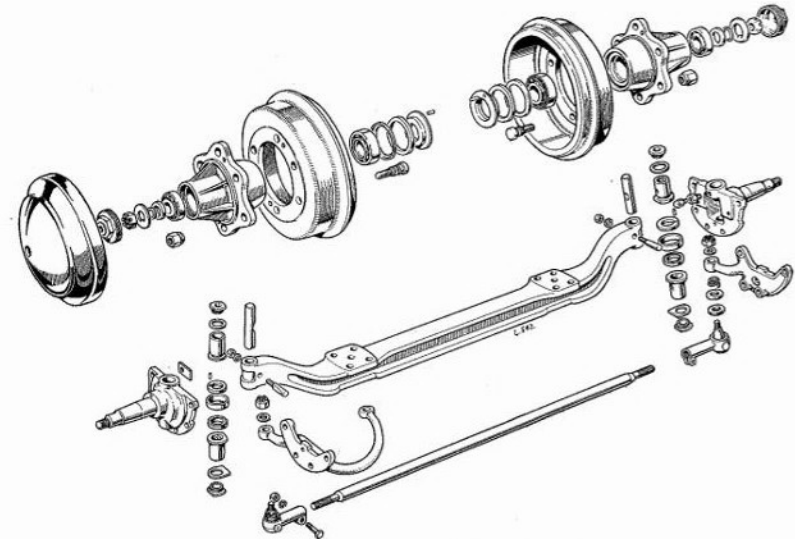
Details of the front axle assembly fitted to KA.30 models
